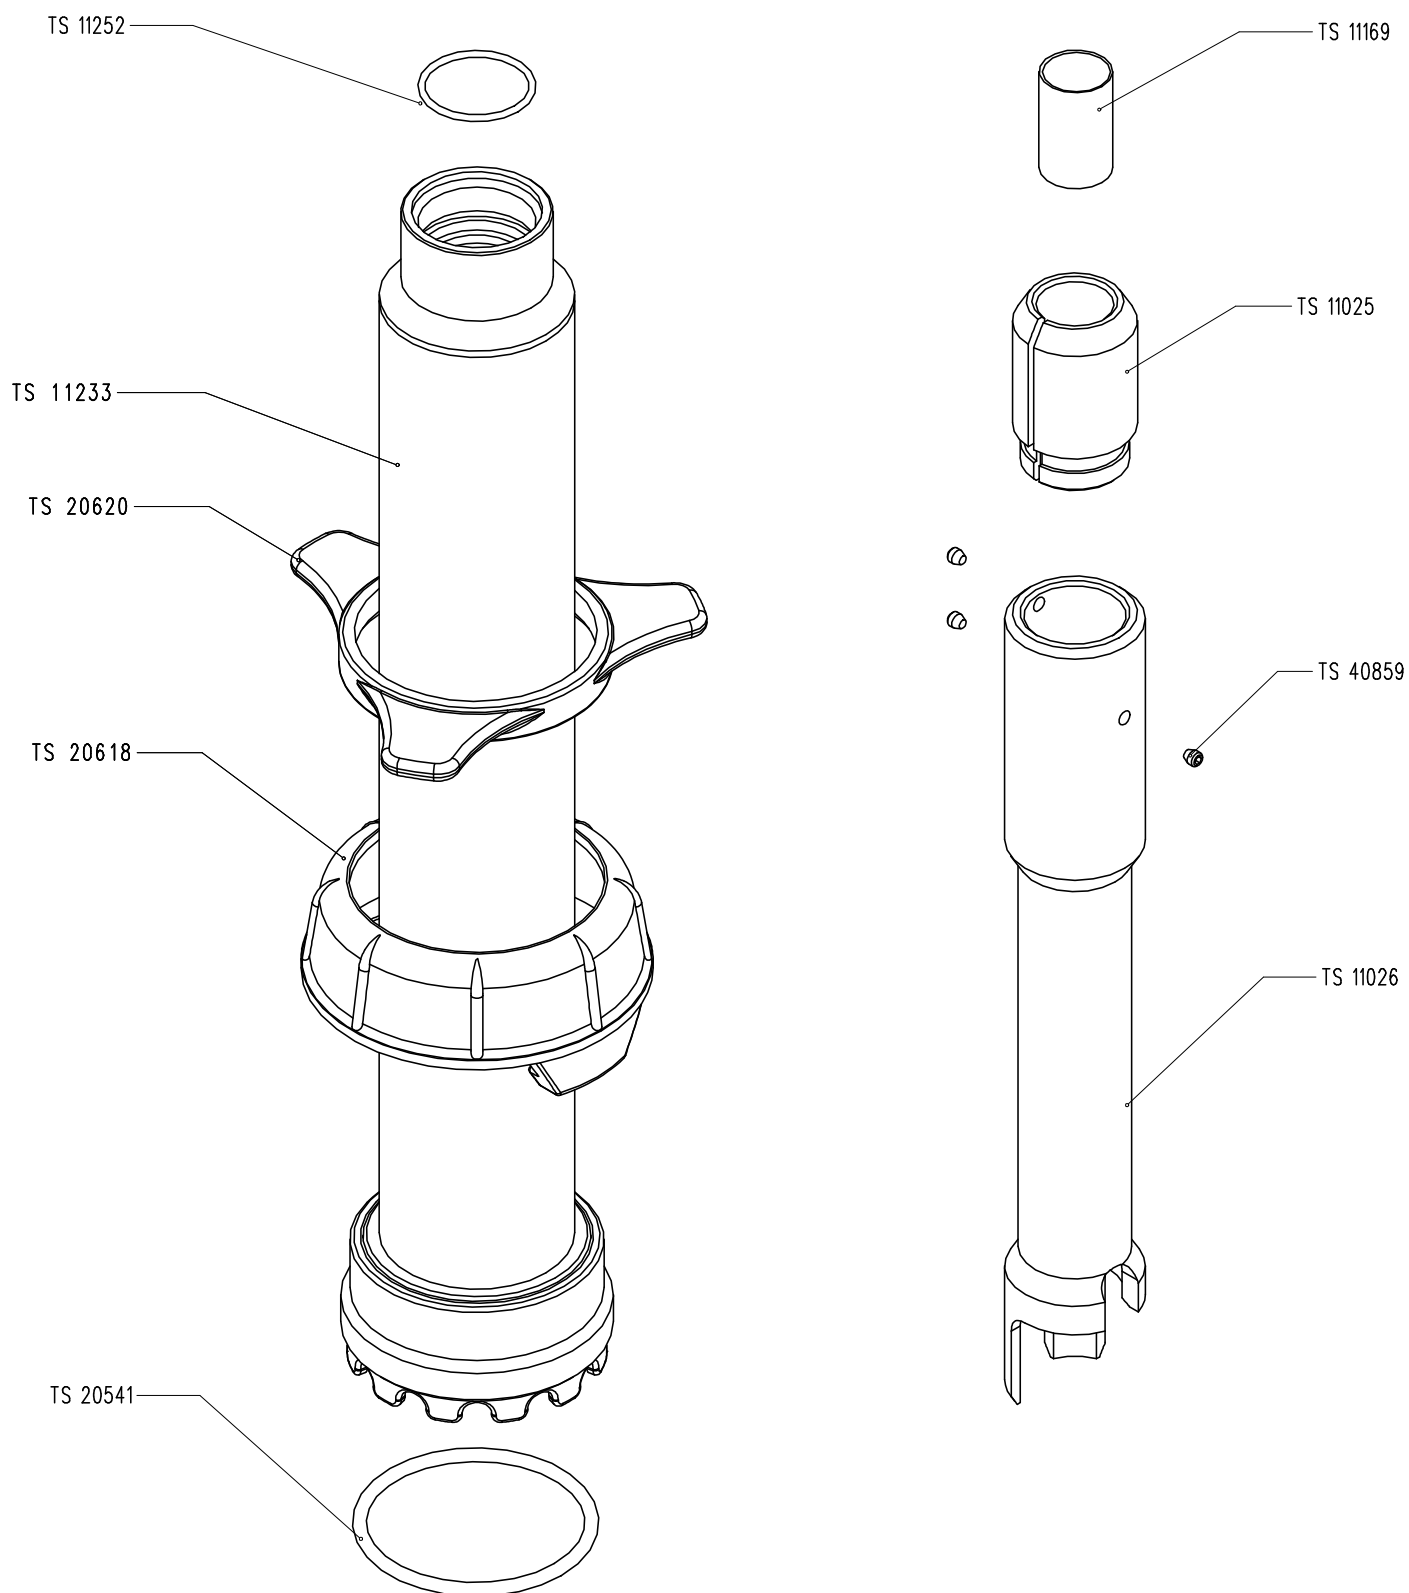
storage tube SS2-Q2 with load TS 10182, details
